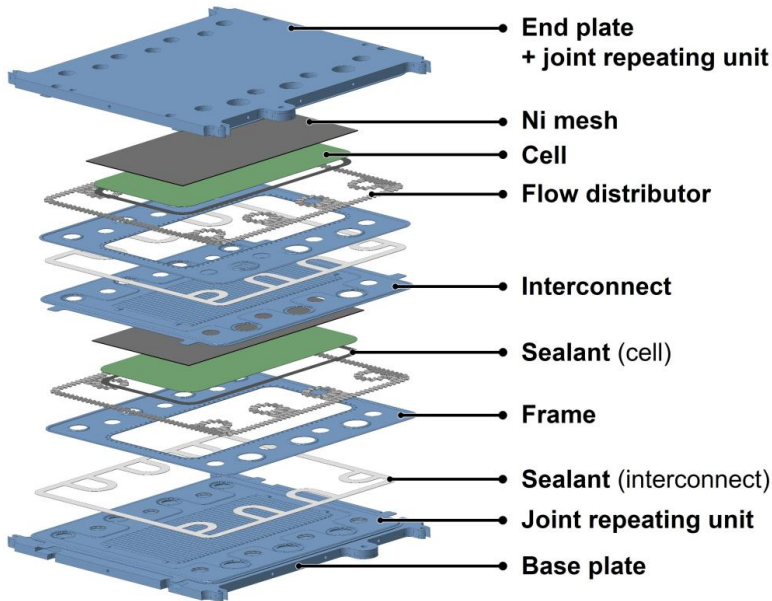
Technical drawing of a Jülich four-layer CS^V-type SOC stack, incorporating two joint and two exploded repeating units. Drawing provided by W. A. Mertens (FZJ-ITE).
